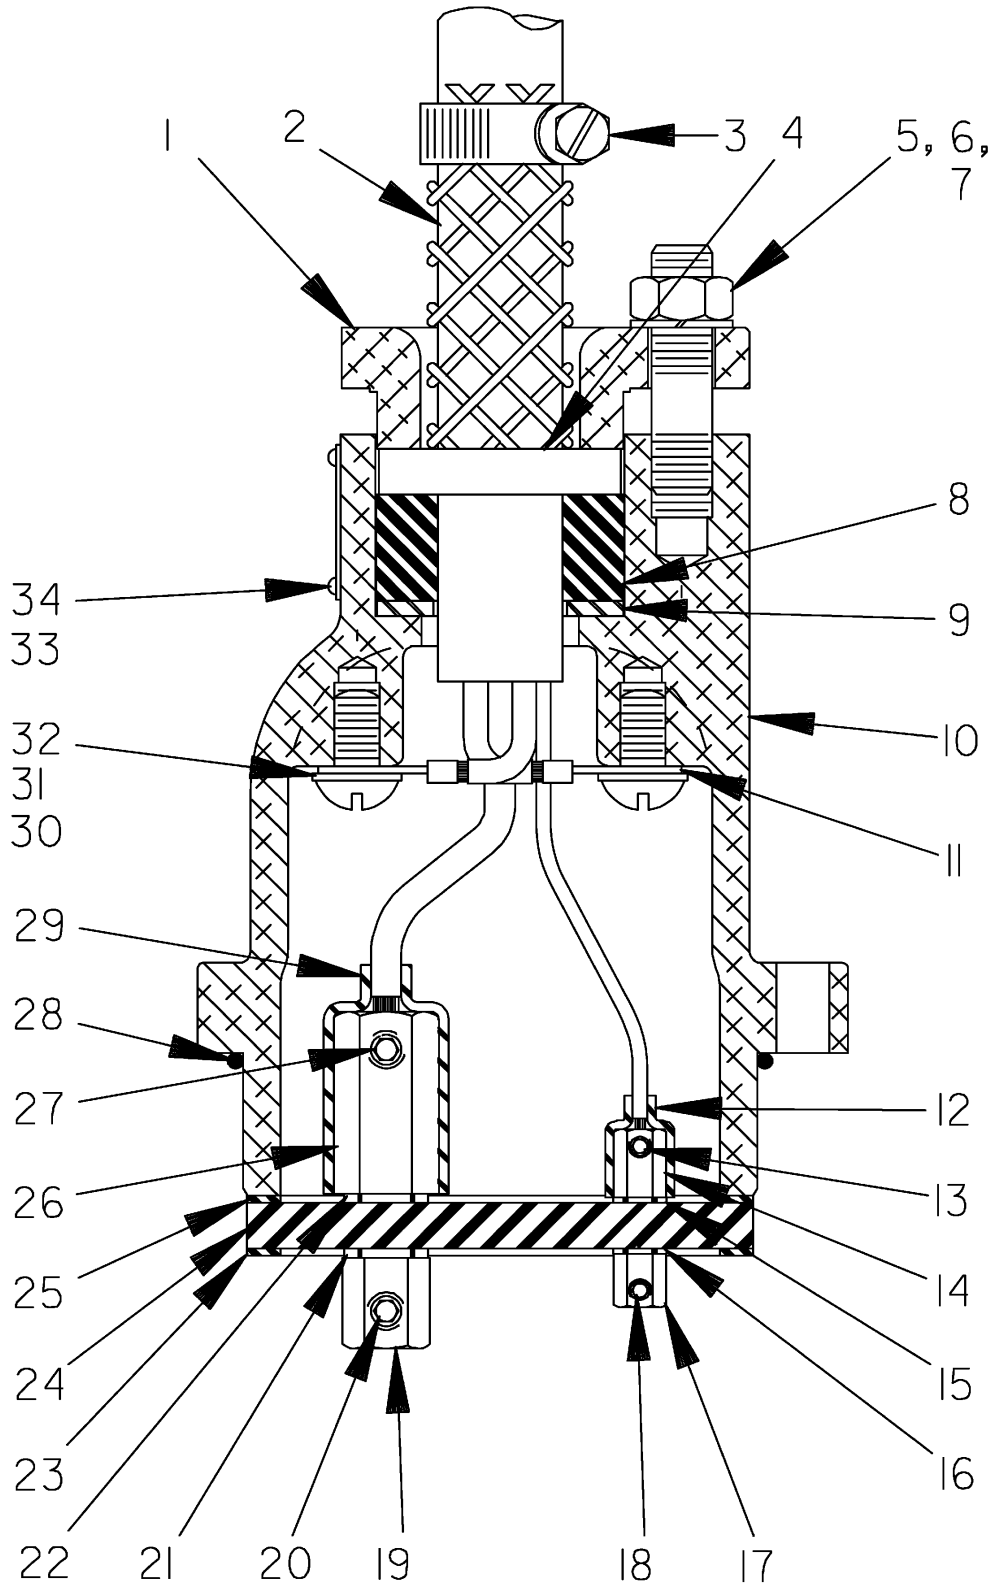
SM4F's Terminal Housing & Cable Assembly
